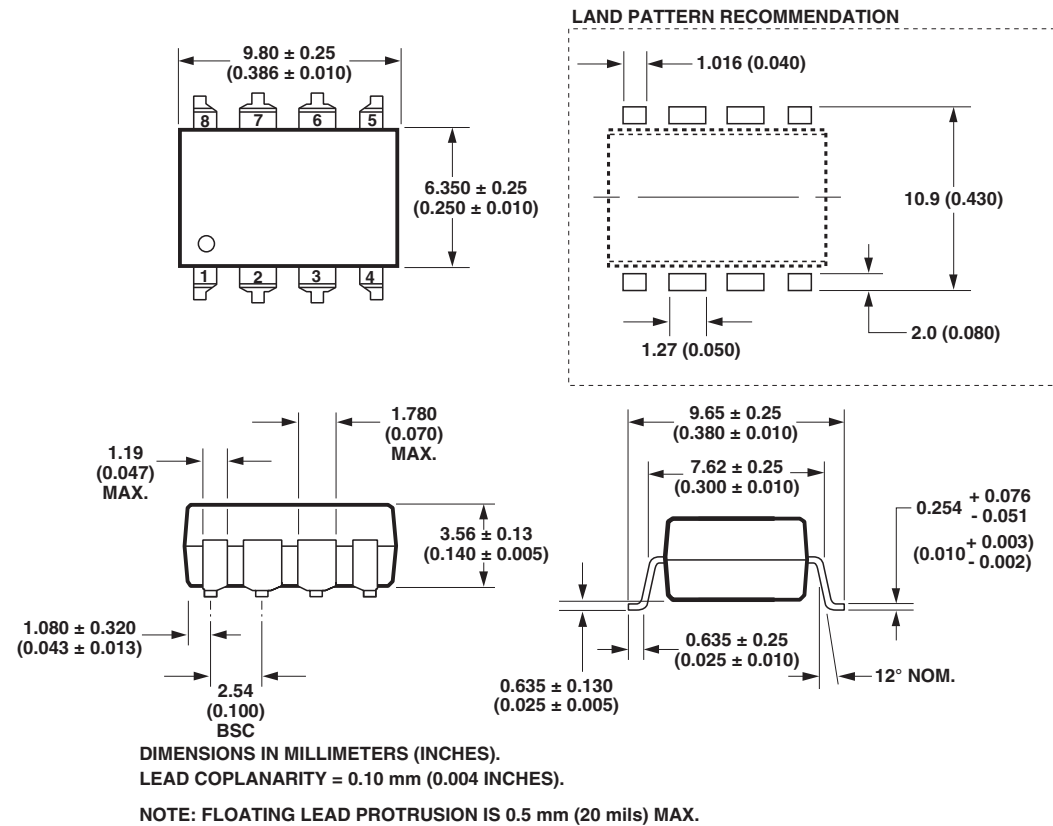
HCPL-0466 Outline Drawing (8-Pin Small Outline Package)
